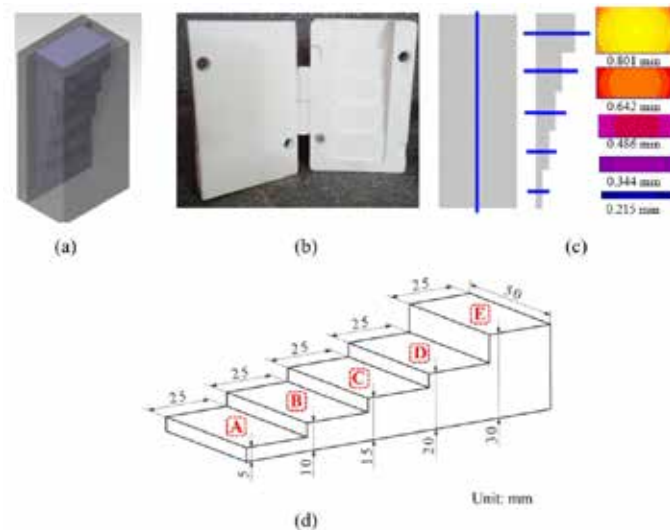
Step mould; (a) solid model, (b) experimental mould, (c) solidification time, (d) technical drawing.
